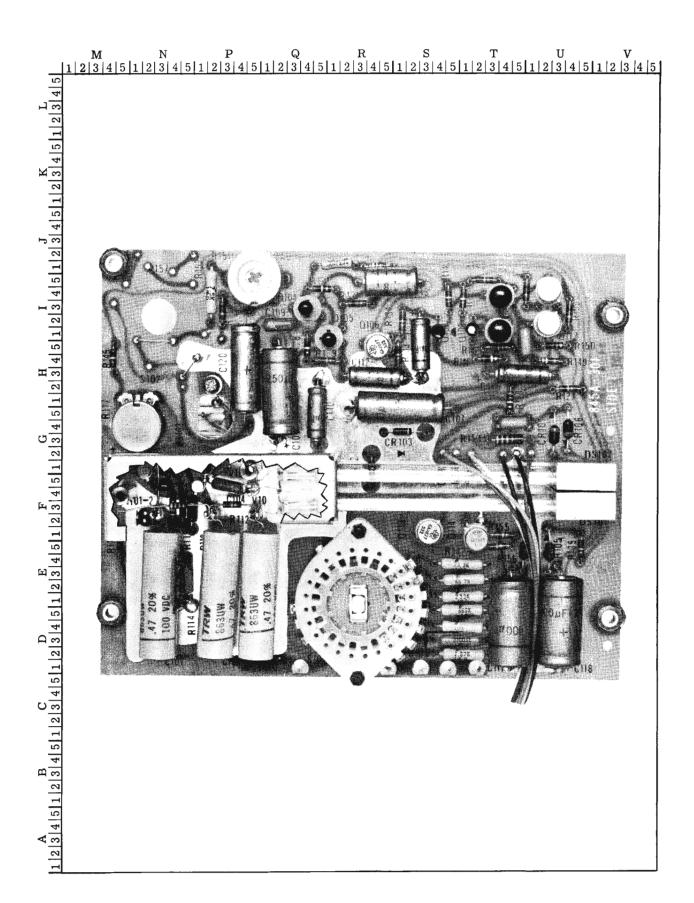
AMPLIFIER P/C ASSEMBLY (SHEET 1 OF 2)
